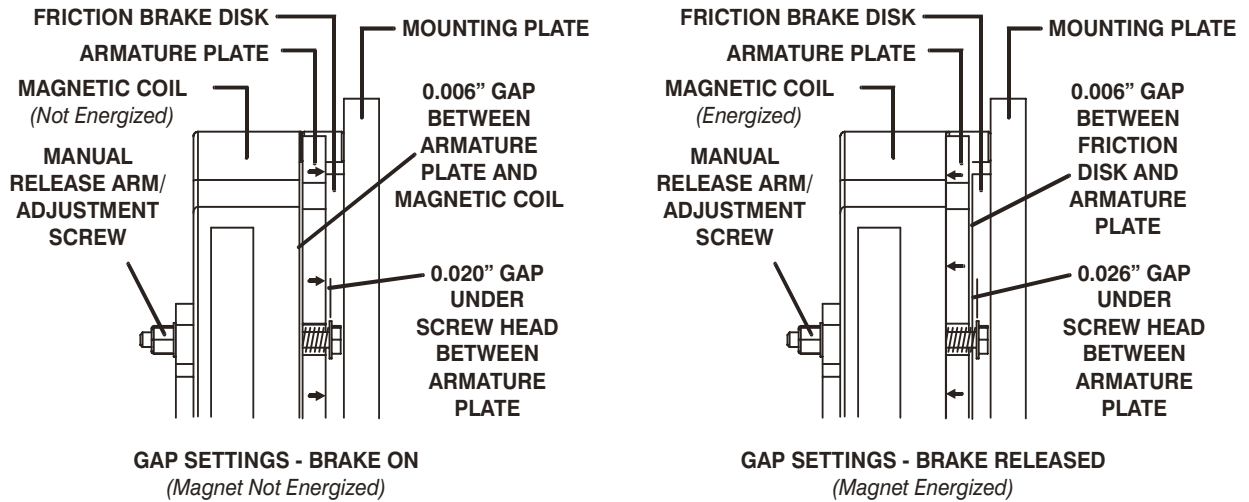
Brake Armature Plate & Brake Disk Adjustment.
